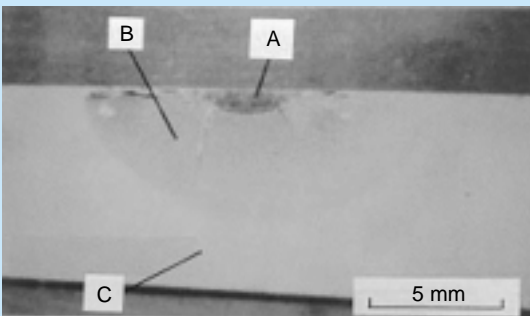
Results of inner ring fracture test ( $P/C = 0.19$ )
